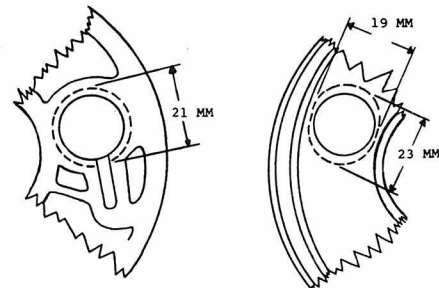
Rotary Valve cover should be modified by enlarging intake passage to 21 MM on the outside and tapering the hole to a 19x23 MM hole on the inside of the cover. Modify intake on crankcase to match rotary valve cover.
